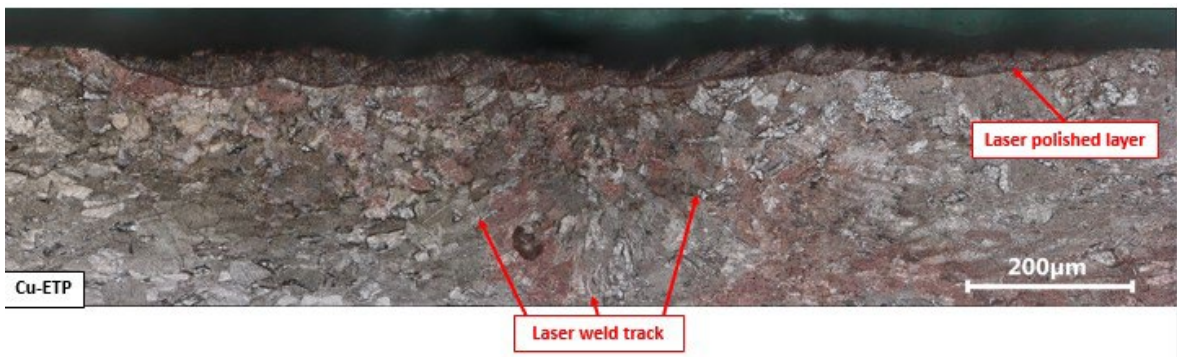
Microscopic image of etched metallographic cross section of laser polished laser micro weld seam on Cu-ETP using best parameters identified. The separate laser polishing tracks are clearly visible while the contrast of the laser weld track is low and only visible in magnification. Cracks or pores are not obvious in this sample.
